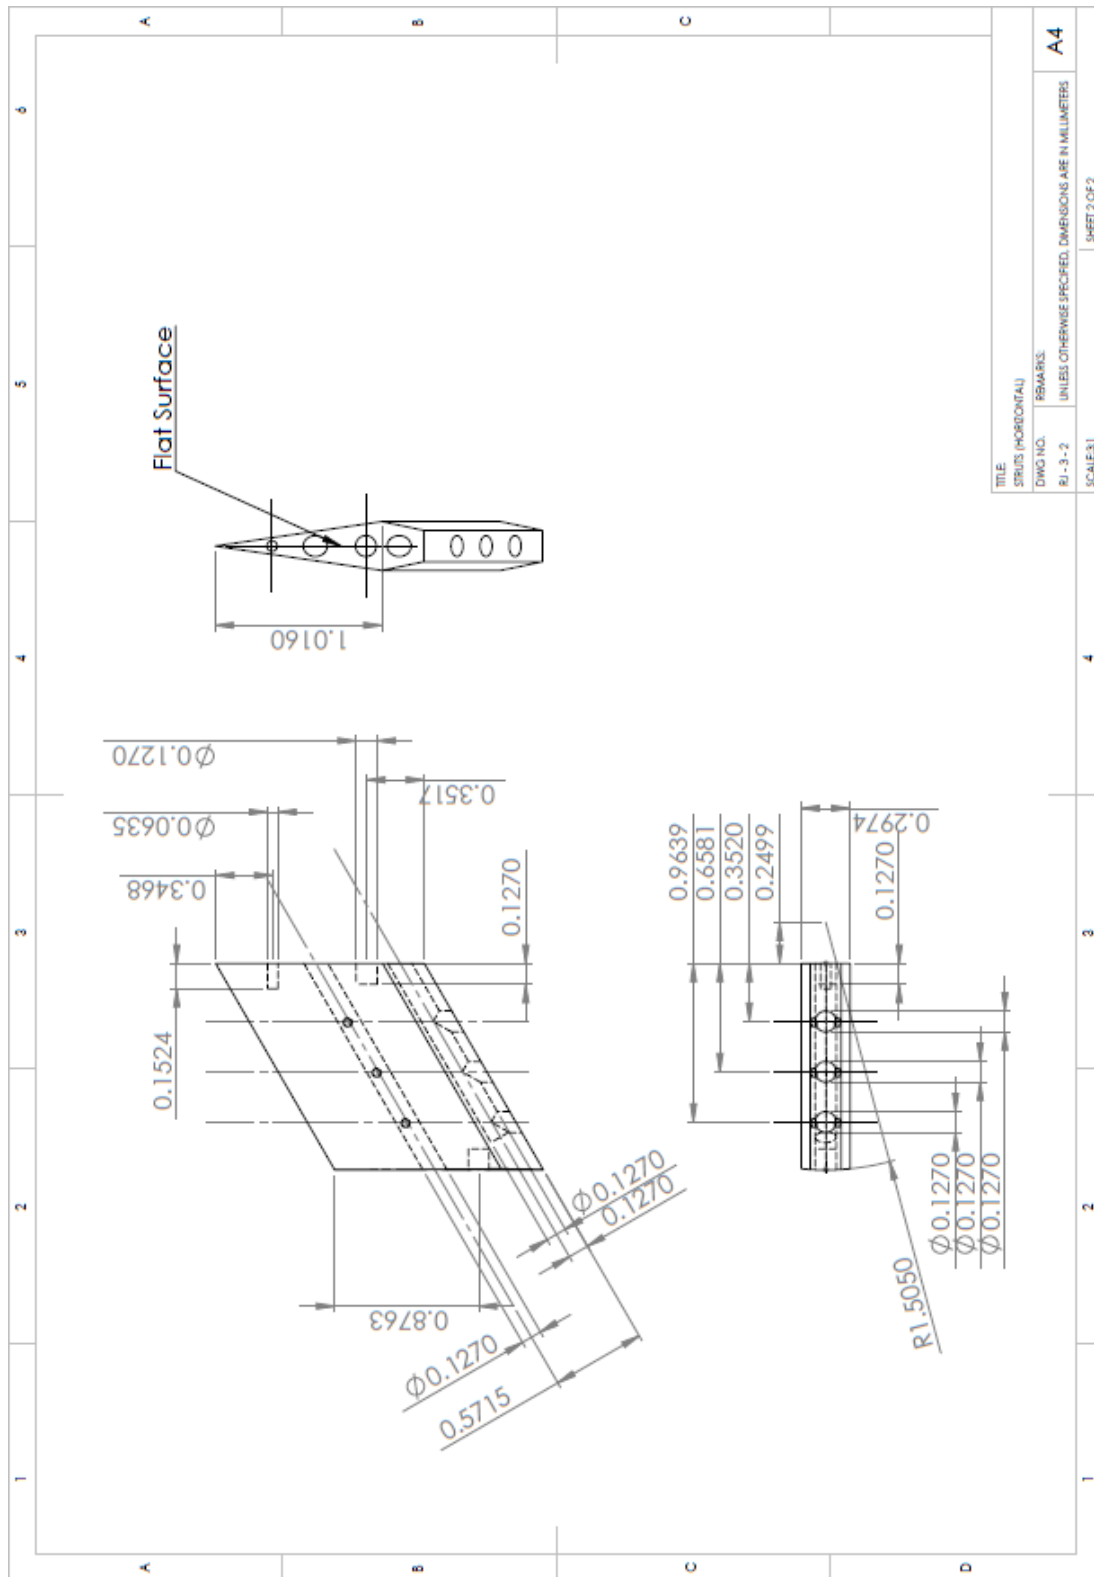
Part drawing: Ramjet horizontal struts (RJ – 3 – 2)
